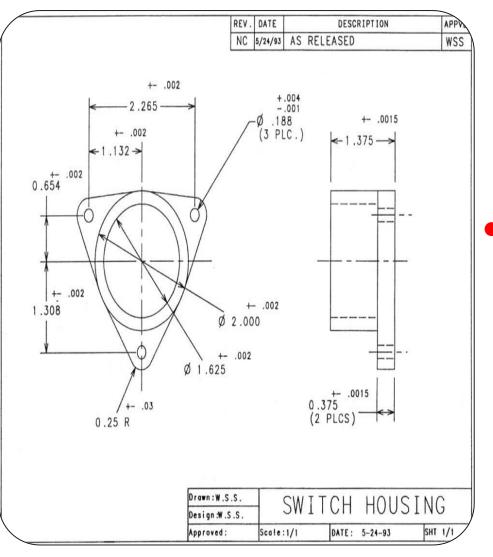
depicts a switch housing that is to be milled on a three-axis vertical machining center with a FANUC 6M control
